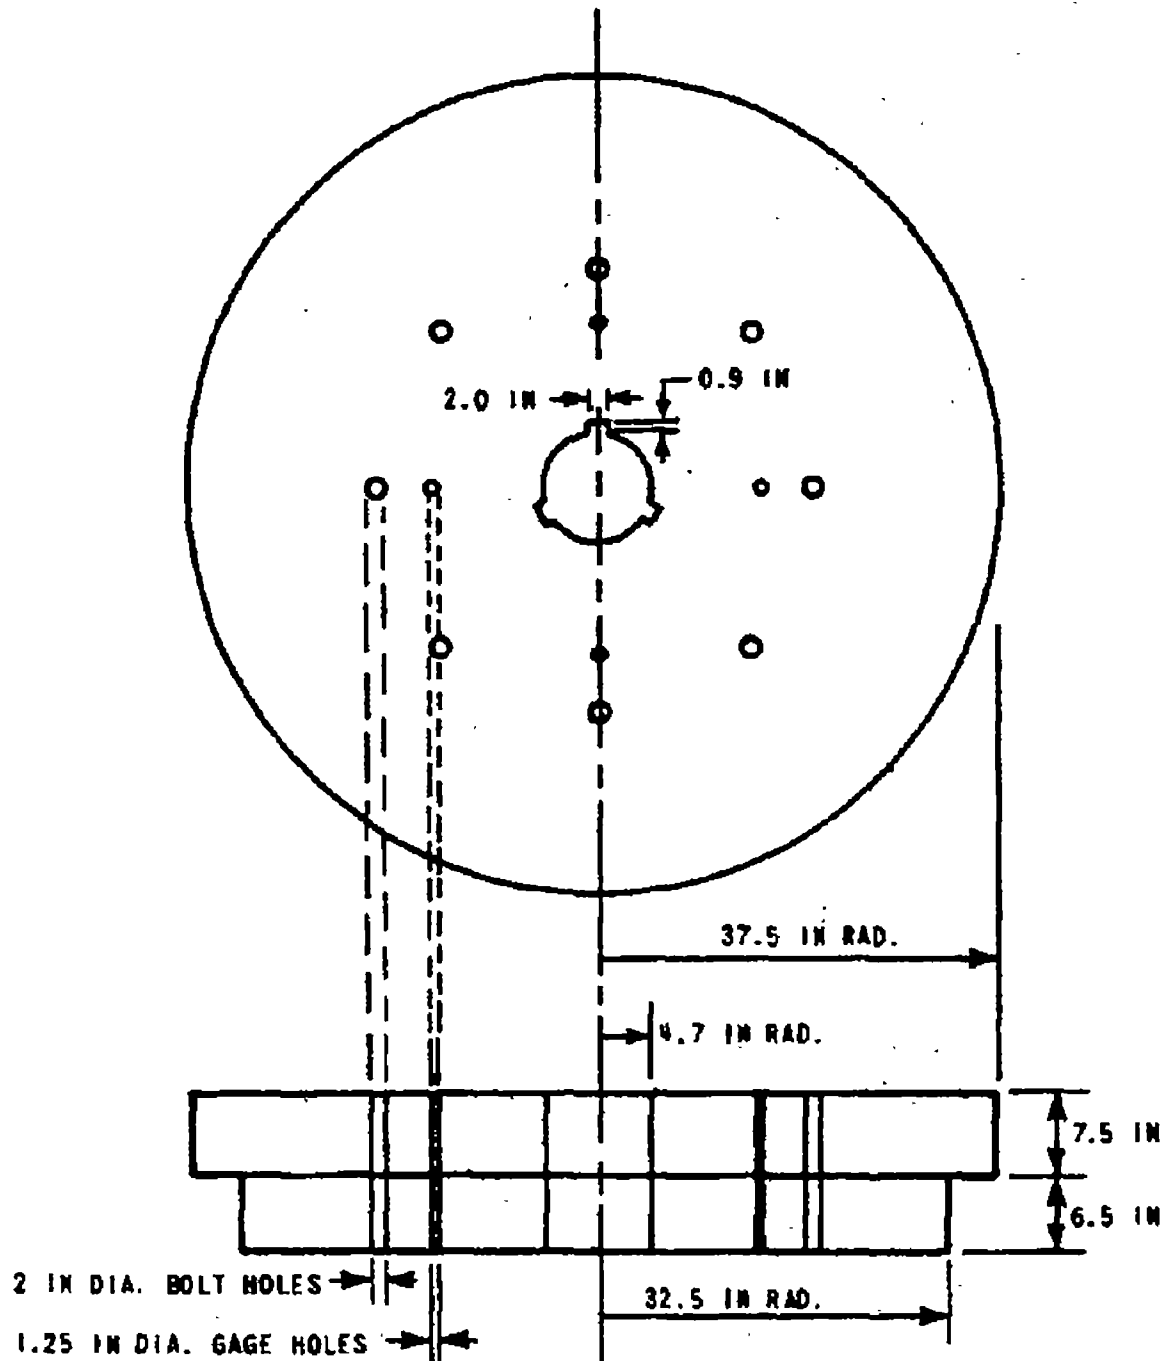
Example of a Typical Westinghouse RCP Motor Flywheel
